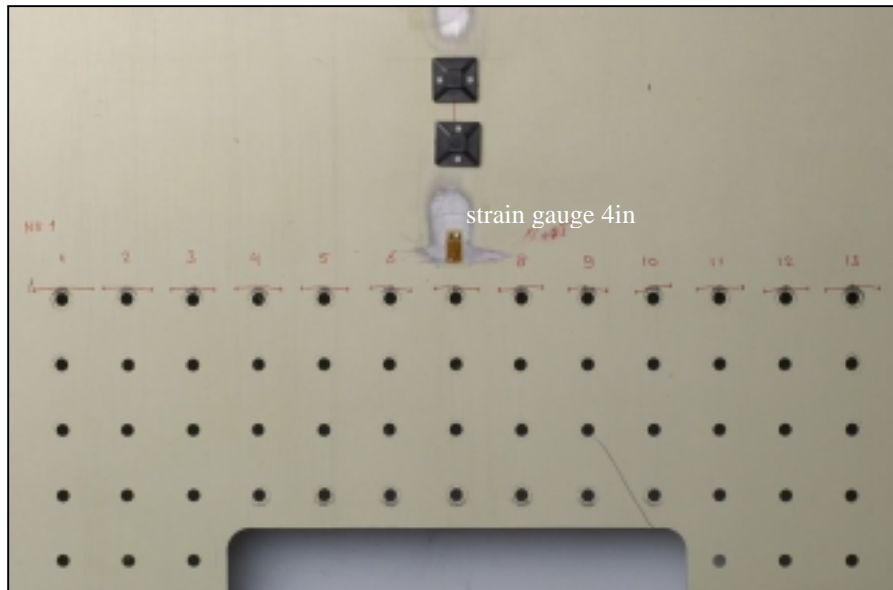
Fatigue cracks in skin panel, rivet row 1
